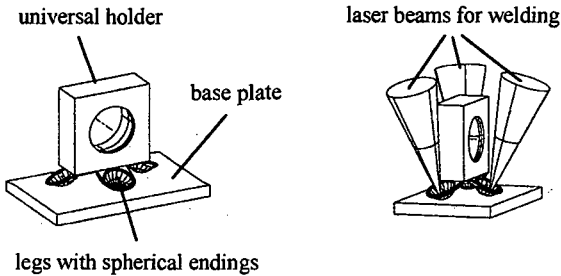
Left: universal holder (10 mm x 10mm x 4 mm) with flexible legs on a base plate. Right: welding of a universal holder on the base plate with three laser beams.
